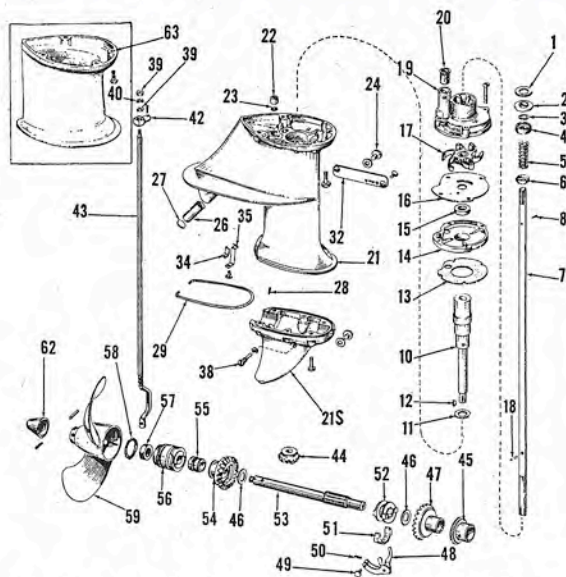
Lower gear case and water pump assembly used on series CD. Series AD is similar.
